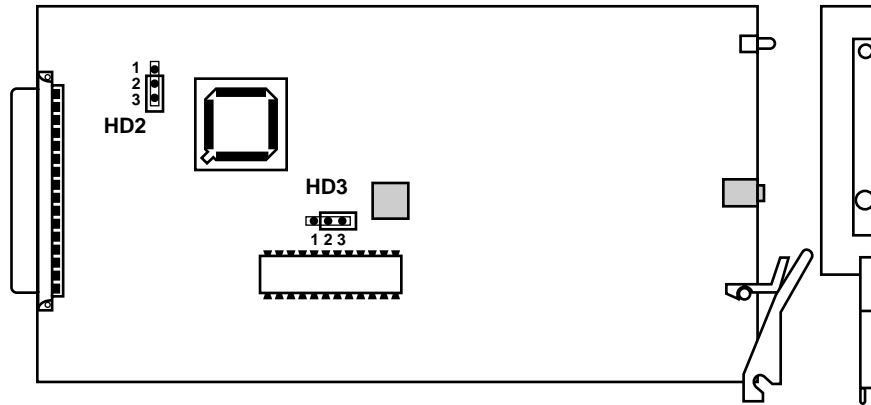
Block Diagram for the High-Speed Data Front Plug Assembly.
